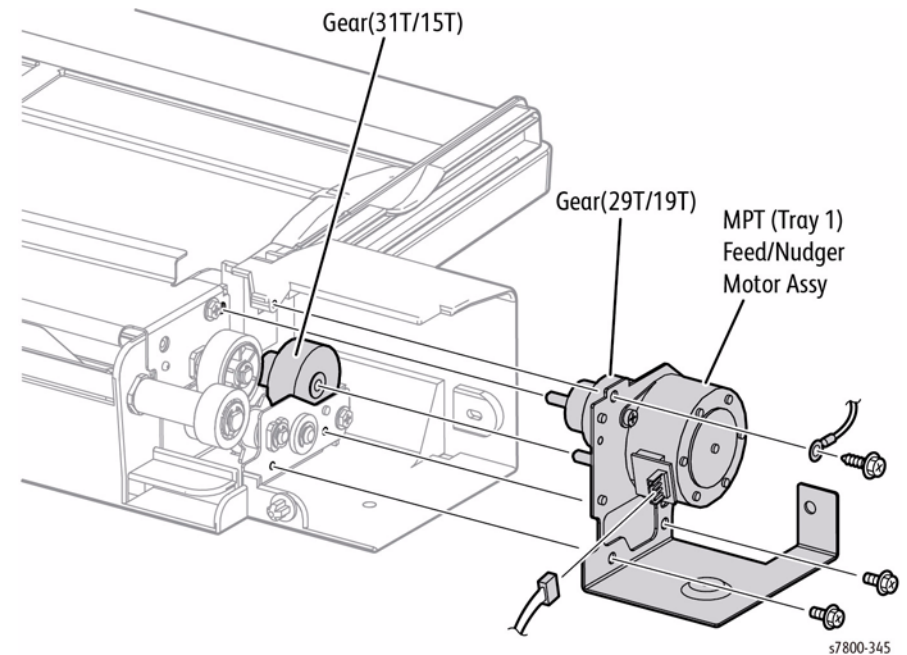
Removing the Tray 1 Feed/Nudger Motor Assembly and Gears
